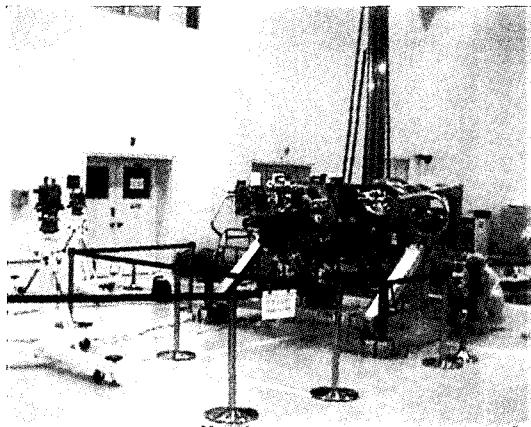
Alignment Measurement Configuration under Rotating 90° of Spacecraft
